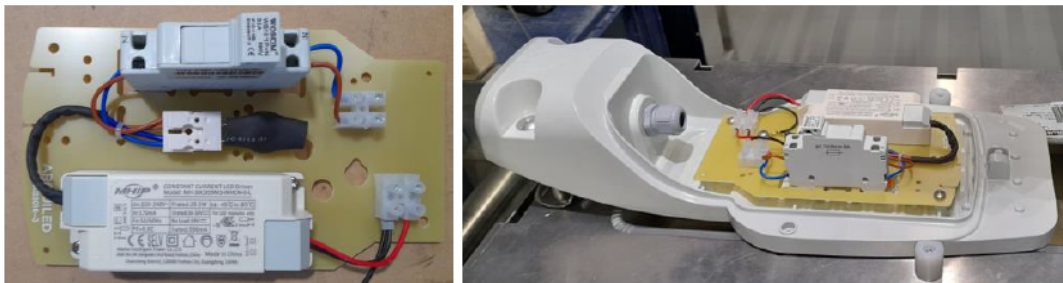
Driver installed in a board (a) and mounted in a luminaire (b) [21]
